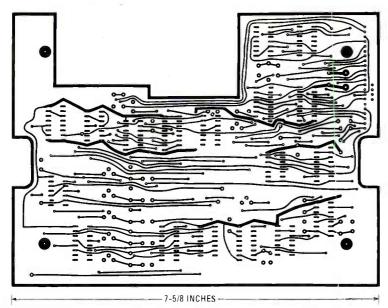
THE BOARD B component-side foil pattern is shown here reduced 50 percent.
